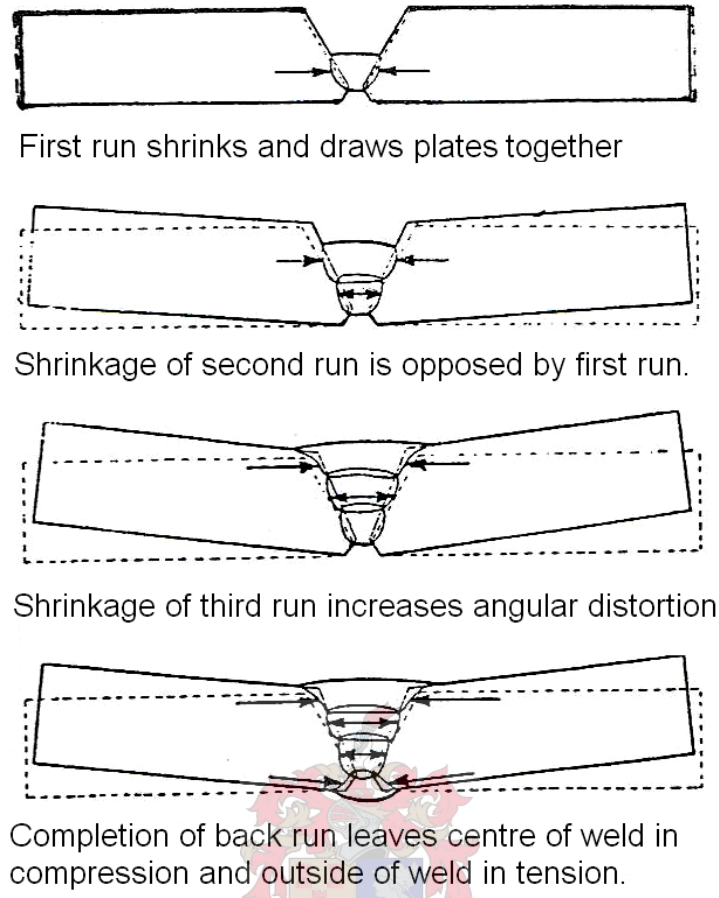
Welding distortion in multiple-run welding (Faure, undated)
